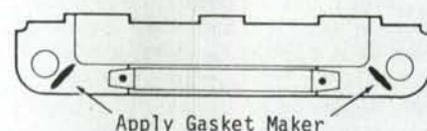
Apply a small amount of Loctite 515 gasket maker on mating surfaces of lower seal retainer half in areas indicated.
